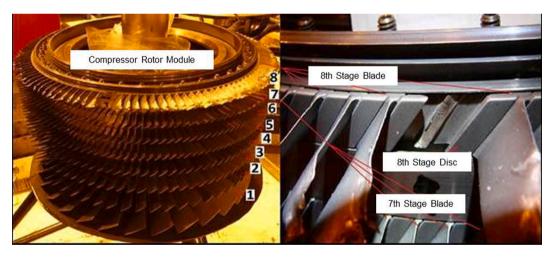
Assembly of Compressor Rotor Module and 7th, 8th Stage Disc Blades.
